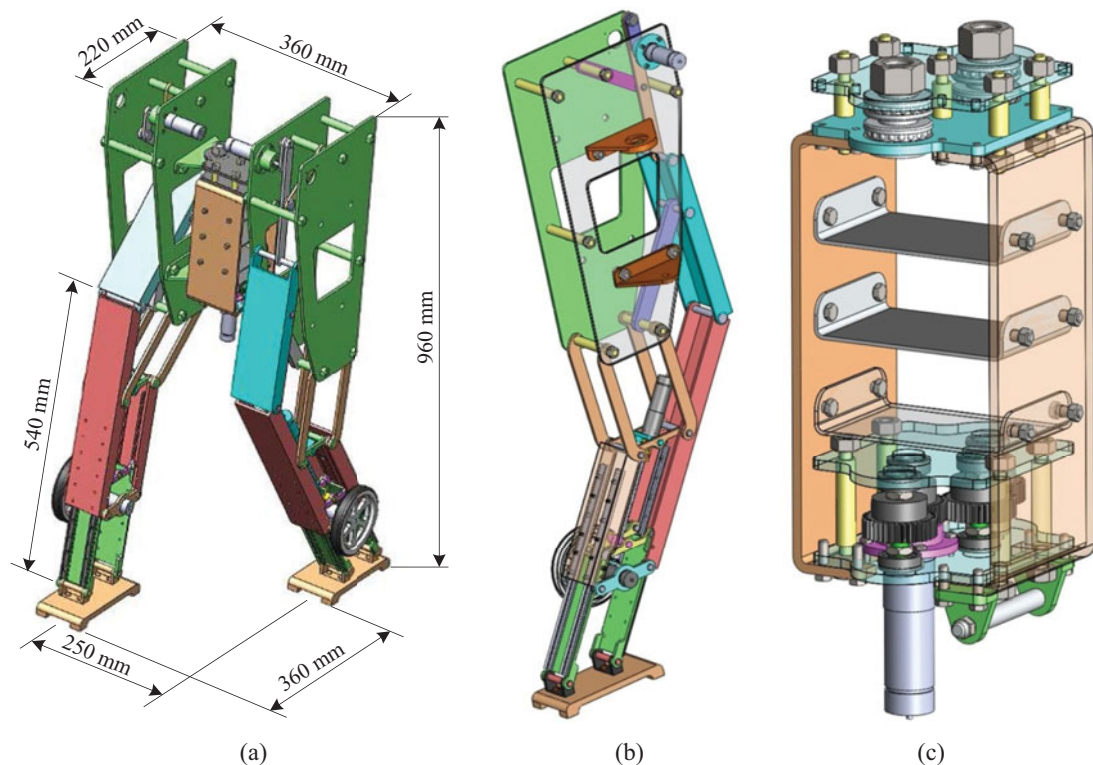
Structure of the biped mechanism: (a) an overview of the biped mechanism with dimensions; (b) a detailed structure of one leg; (c) a detailed structure of the body.
